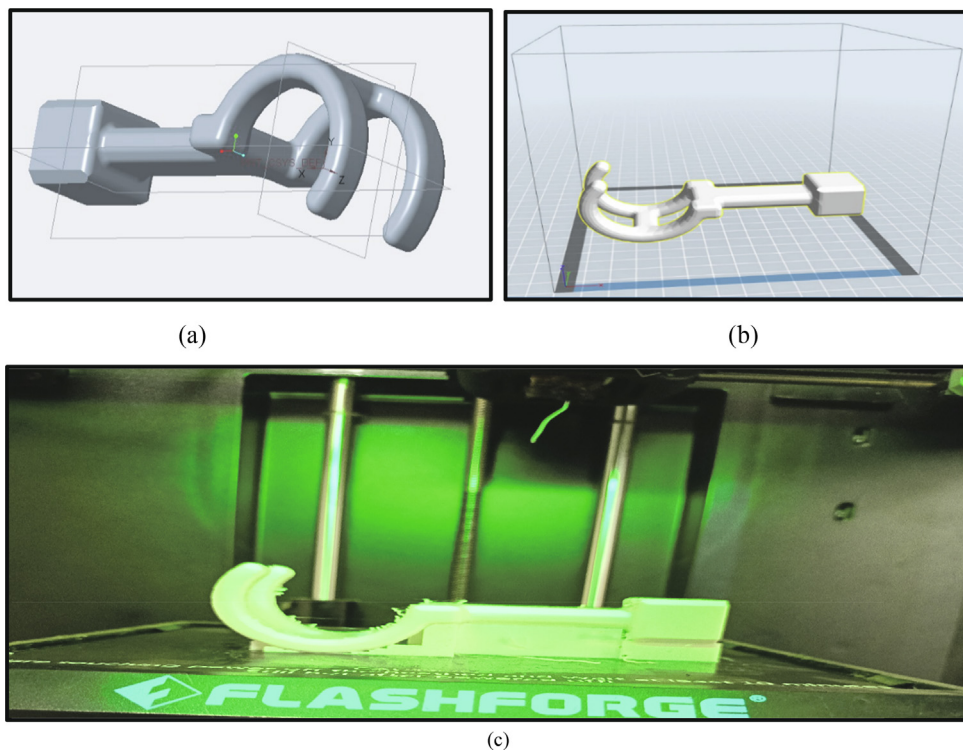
(a) Proposed kit design (b) its in-slicing software and (c) The manufacture of personal protective equipment (PPE) from the PLA filament in 3D printing machine.
